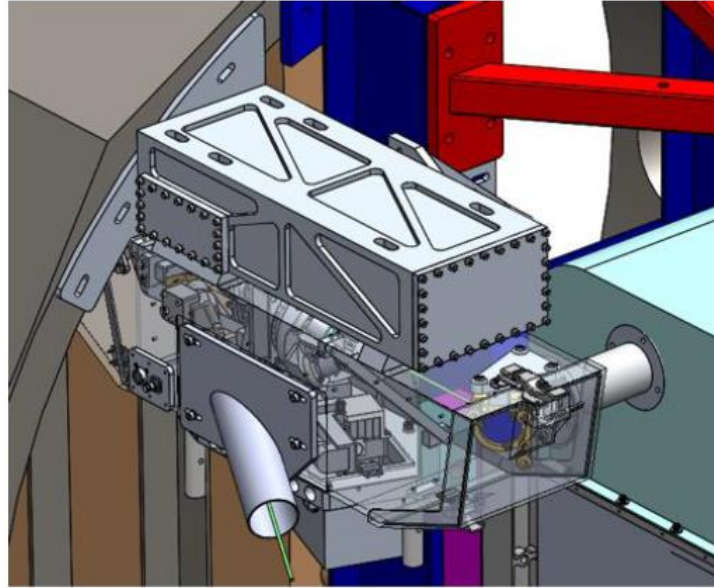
CAD model of the AG enclosure mounted on the telescope secondary module.
